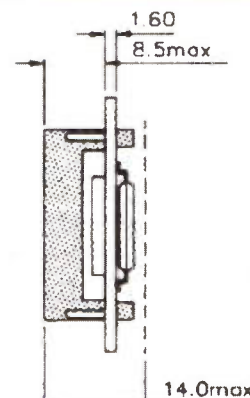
Side dimensions of replacement 16x2 LCD module (NT57M)
